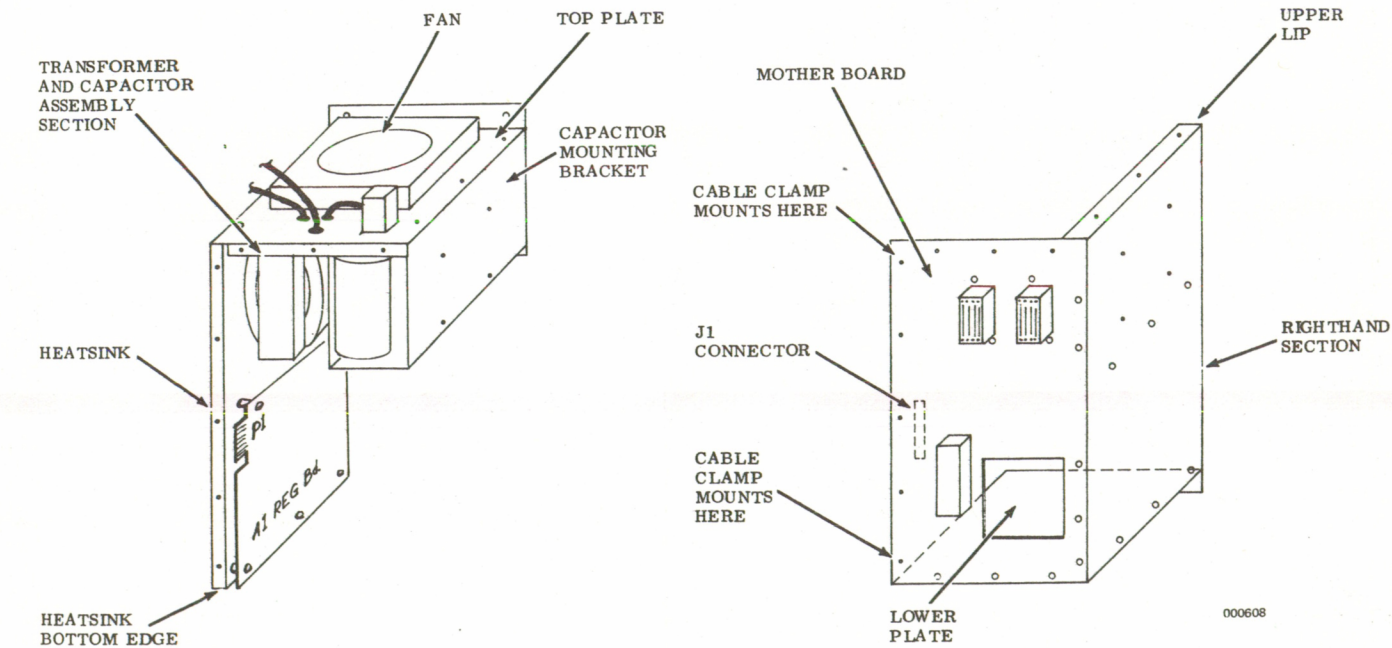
Headdriver Housing - Disassembly Details - Interior
